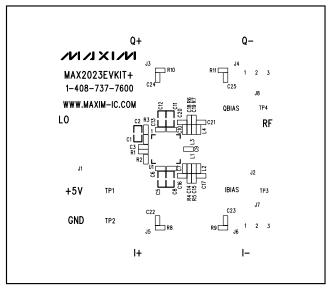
MAX2023 EV Kit PCB Layout—Top Silkscreen
